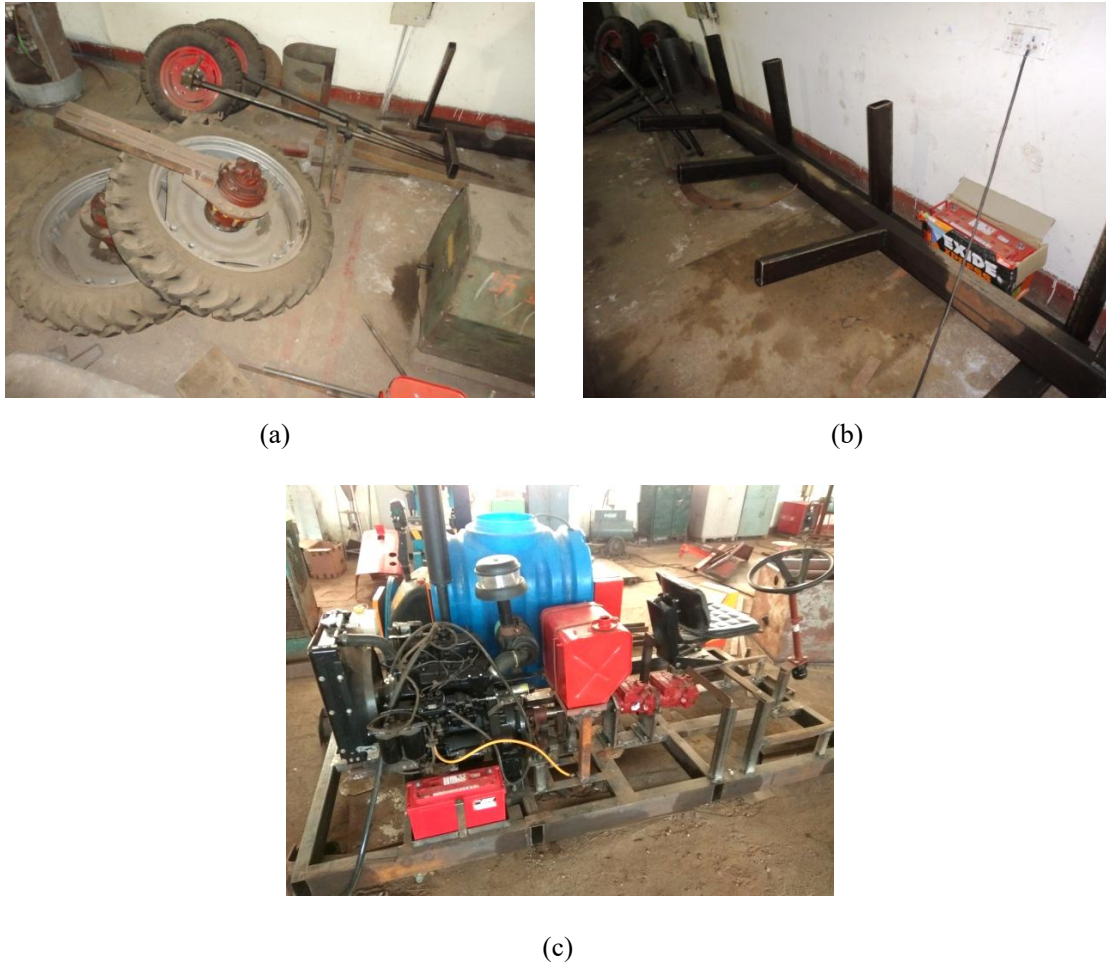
View of various components of vehicle: (a) front and rear wheel assembly, (b) outer telescopic frame, (c) main chassis
